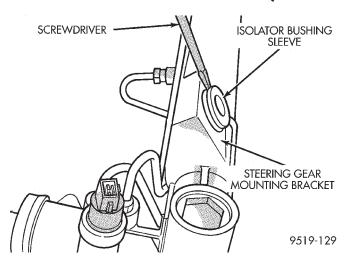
Mounting Bolt Isolator Sleeve Removal ASSEMBLY
